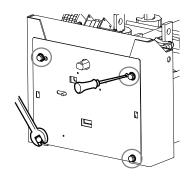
Remove the four (4) panel mounting bolts (M8) and two (2) pan-head screws (M4) from the VCB.
